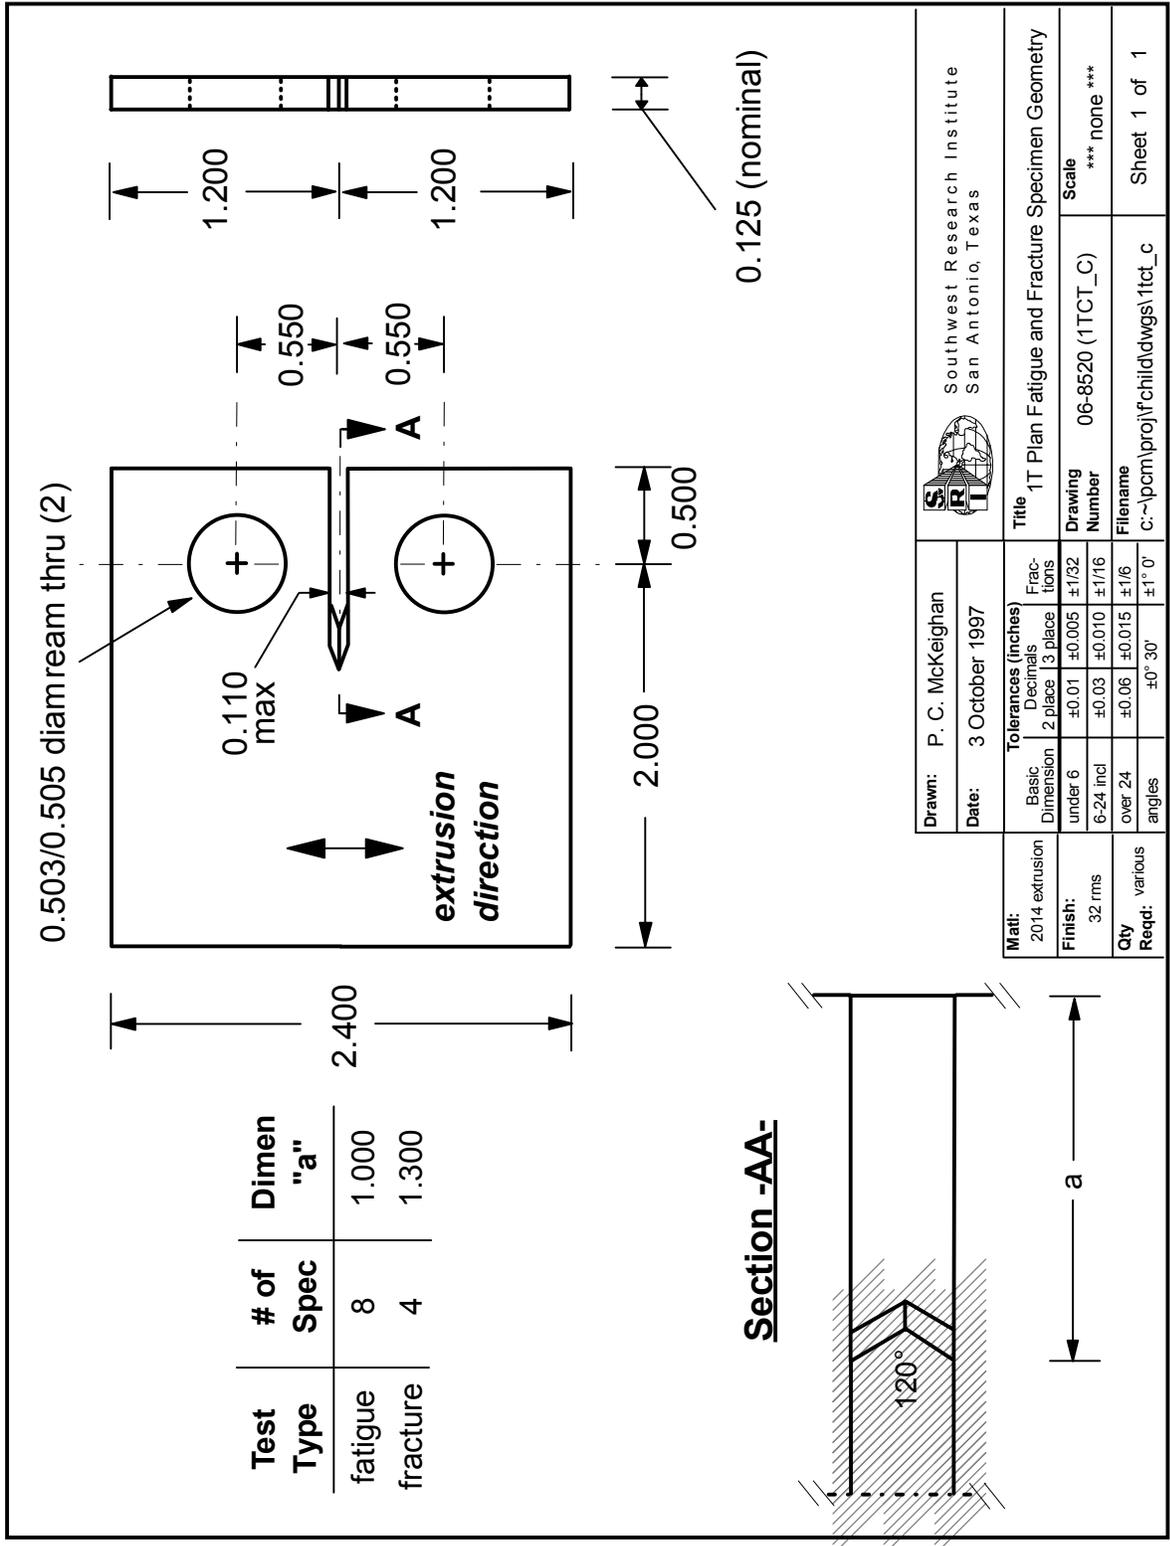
Design for the 1-T Plan Geometry Compact Tension Fracture and Fatigue Crack Growth Specimens
